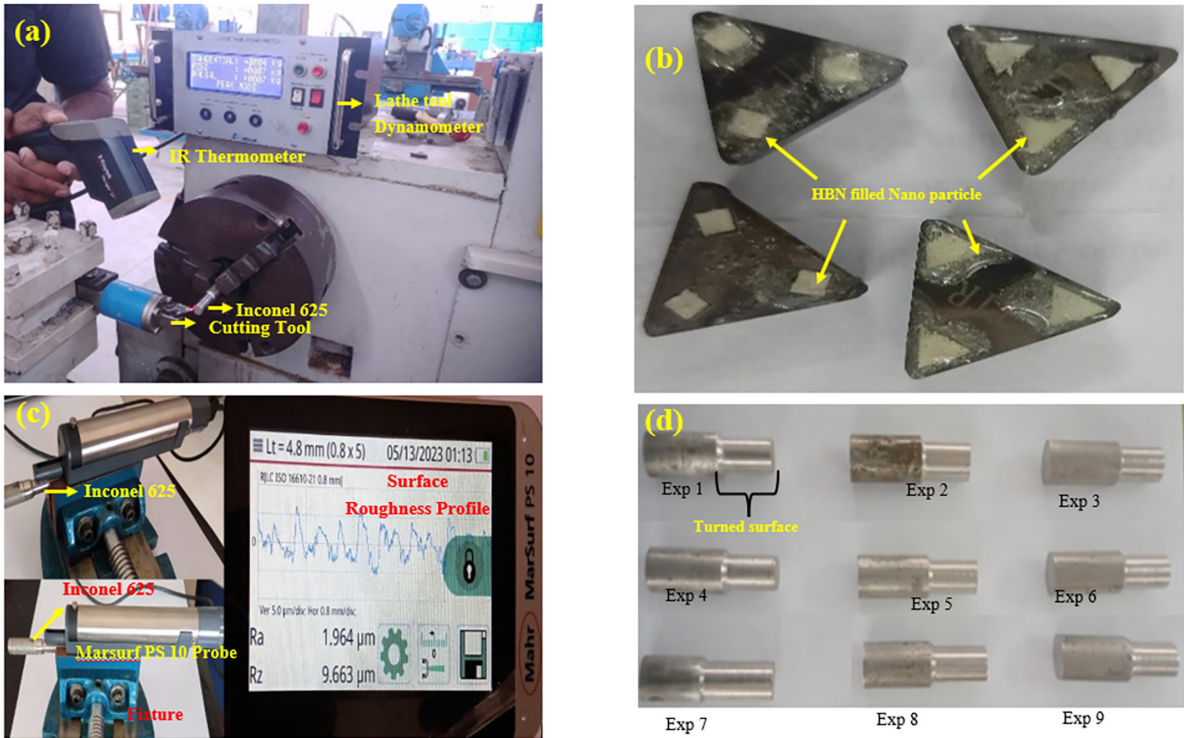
(a) Experimental setup (b) HBN filled WC inserts (c) MarSurf PS 10 Surface measurement device (d) Inconel 625 machined components.
